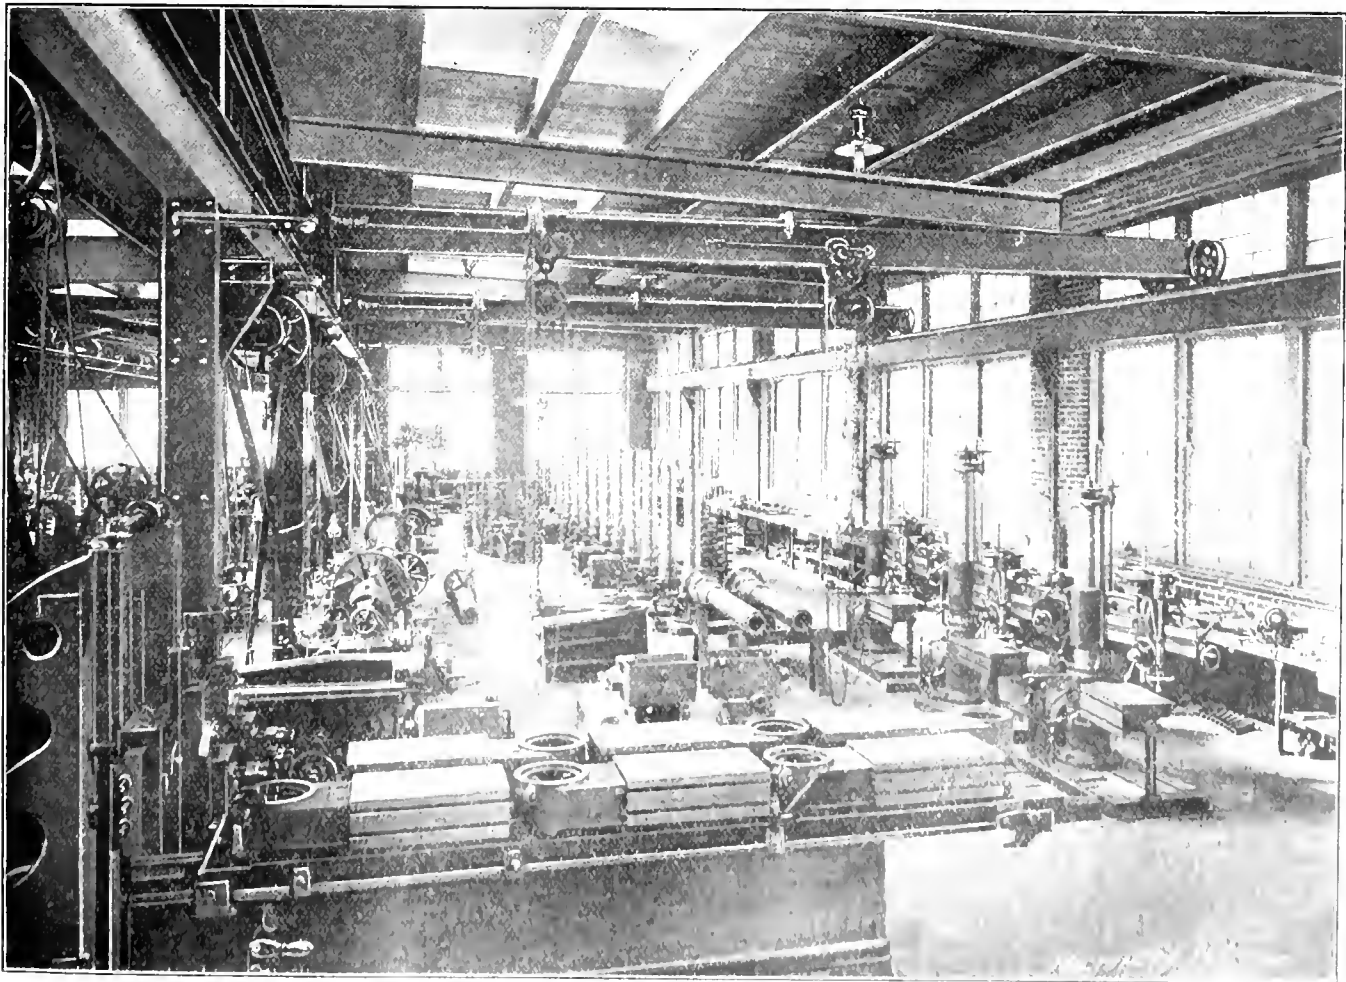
View of the Planing Department of The Mueller Machine Tool Company.
